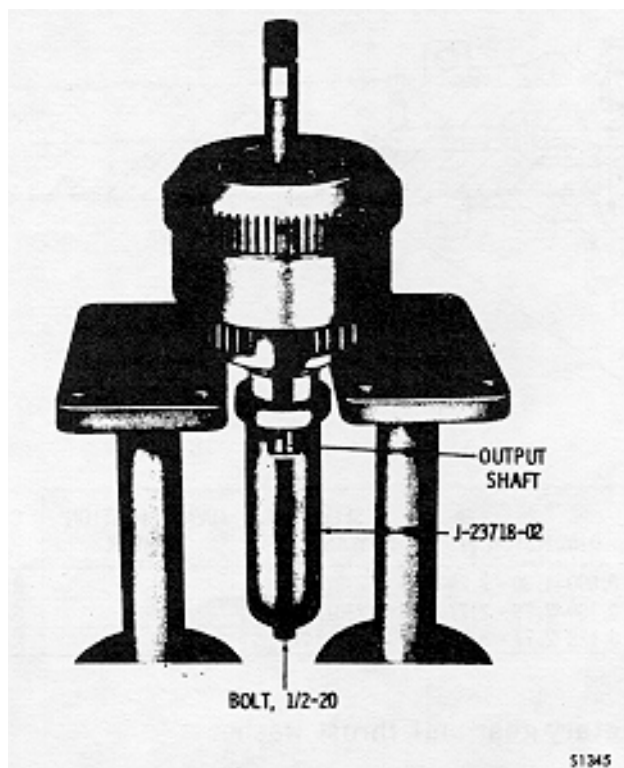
Planetary gear unit assembled for measuring for selective thrust washer
